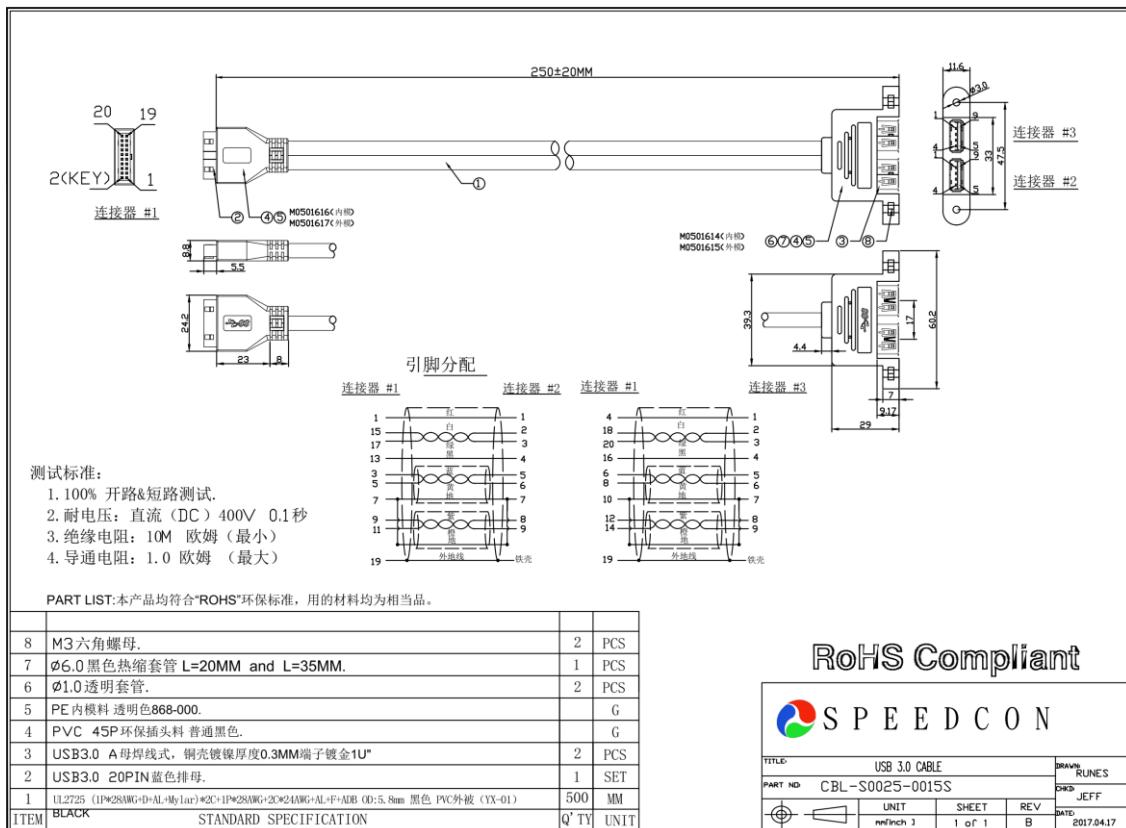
19pin Pitch 2.0 Connector to 2 USB Cable Drawing
